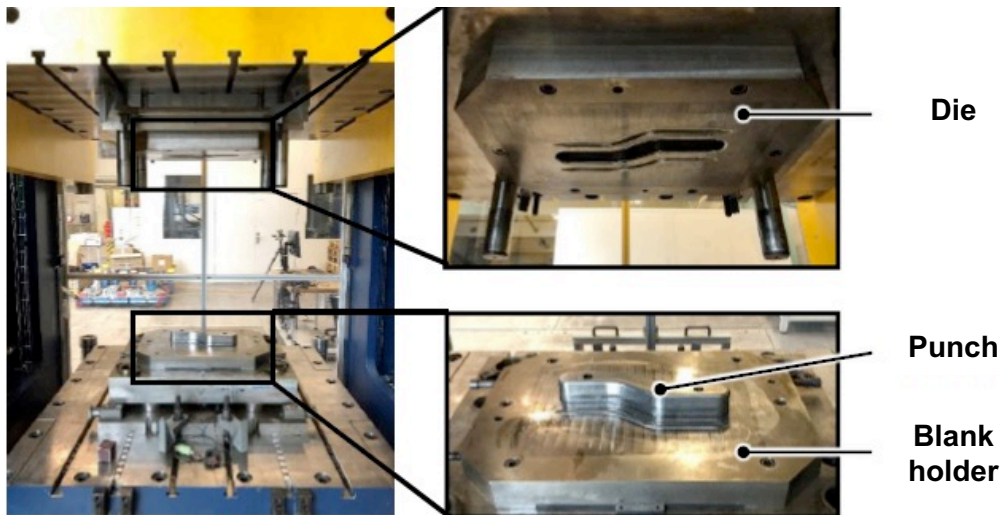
Tool (with draw beads) and setup for deep drawing of the S-Rail component from LFT
